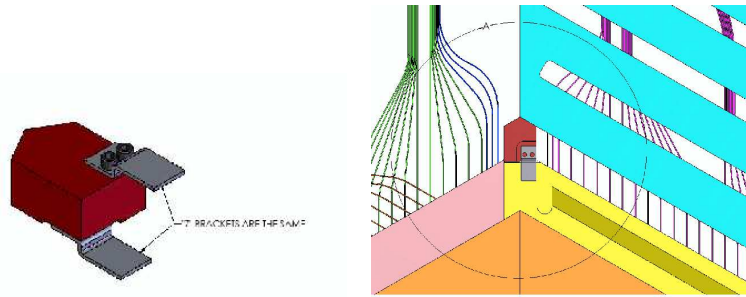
Left:* Engineering drawing showing proposed h-clip. *Right:* Drawing showing an h-clip installed in a MINERνA module. The triangular end of the h-clip will be welded to the OD frame by WBS8 during frame assembly. The smaller metal pieces will clamp the scintillator planes into position. Images courtesy of R. Flight.
